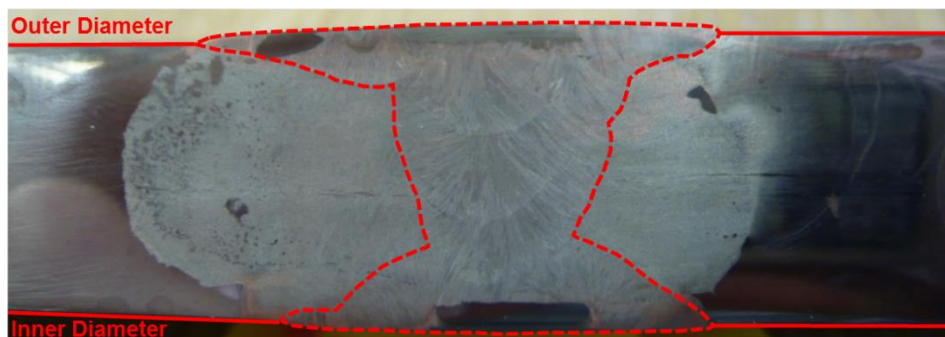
Cross section of a longitudinal weld. Note that the outer diameter FZ passes well into the initial weld made on the inner diameter. Also note that the final weld passes were sometimes offset from the centerline of the weldment, yielding an asymmetric appearance.
